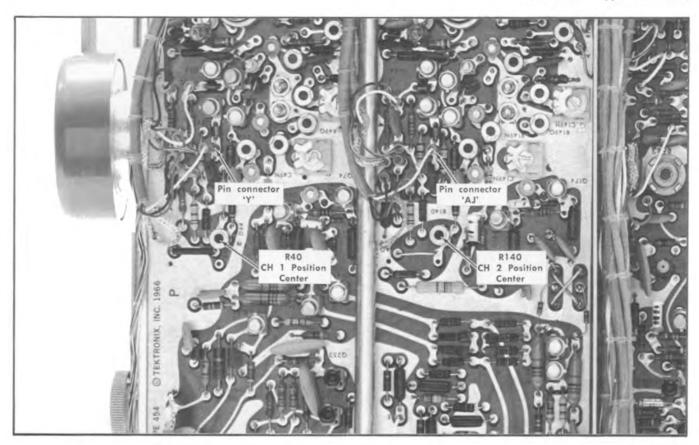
Location of Channel 1 and 2 Position Center adjustments and test points (Vertical Preamp circuit board).
